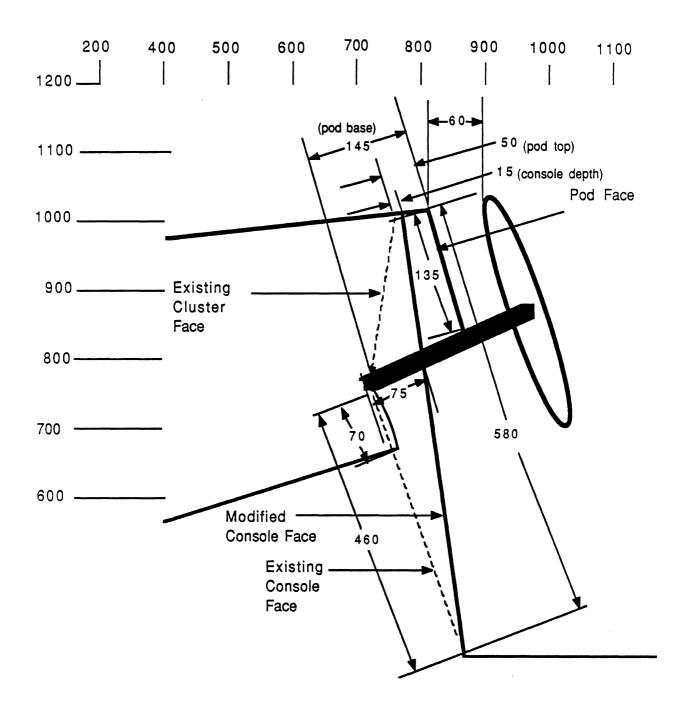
, Side View of Instrument Panel (All measurements in millimeters.)
